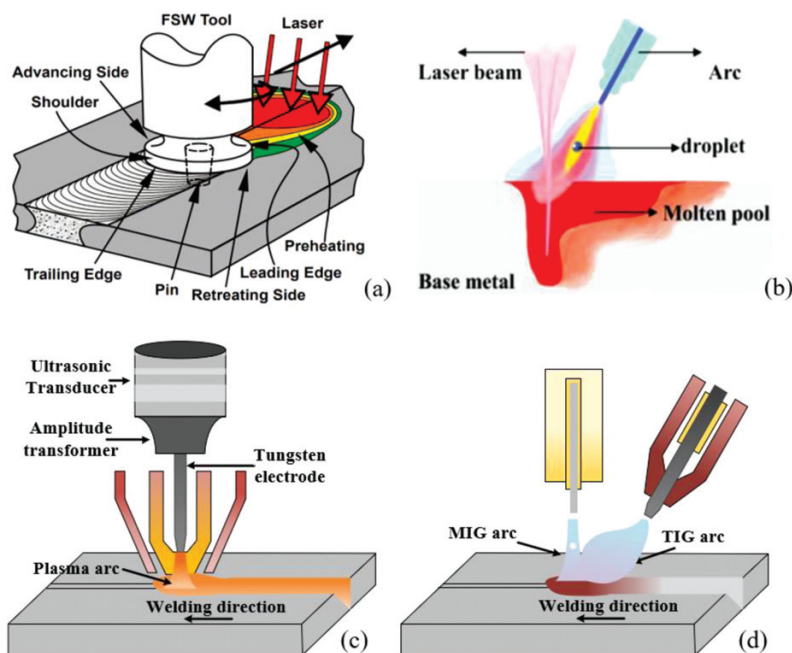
a) Laser-assisted friction-stir-welding schematic³, b) laser-arc hybrid-heat-source-welding schematic⁵, c) ultrasound-plasma hybrid-heat-source-welding schematic and d) TIG-MIG hybrid-welding schematic
